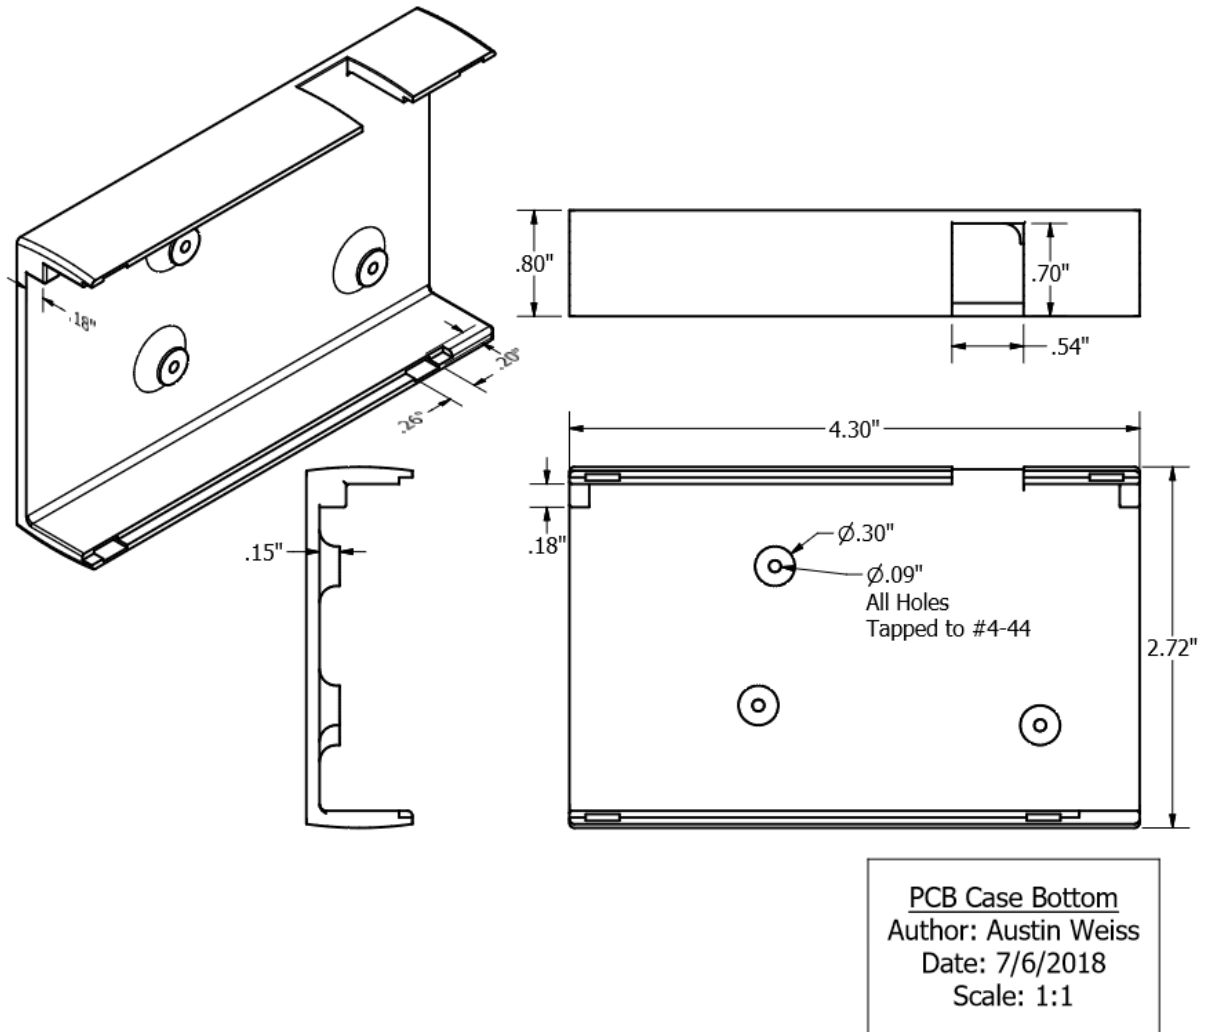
3D printed base for PCB enclosure rise and secure the board sufficiently to the base.
